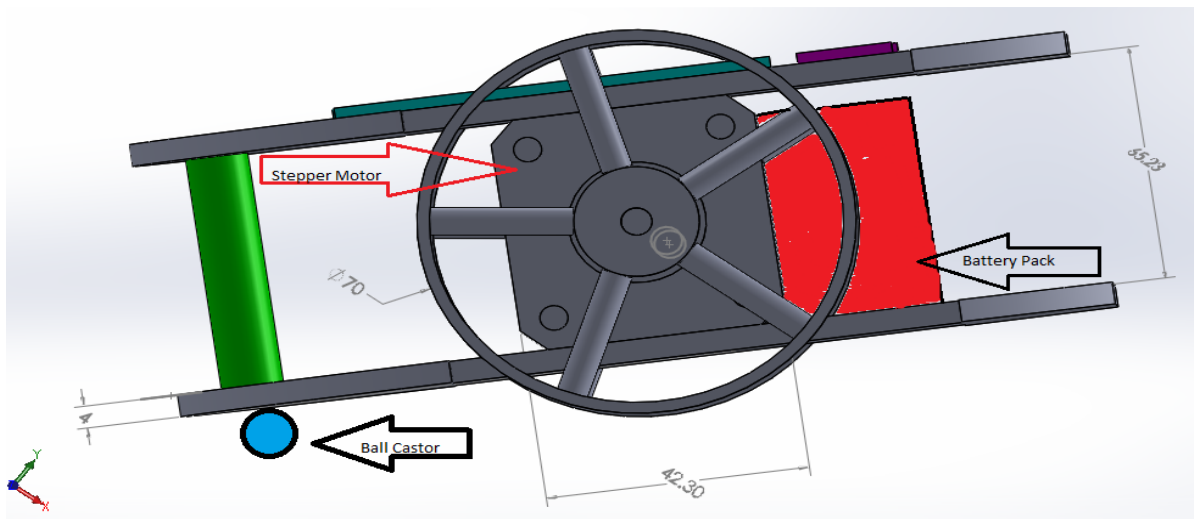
Side View - The middle will consist of the stepper motors, battery, support. Bottom will have the ball castor.
